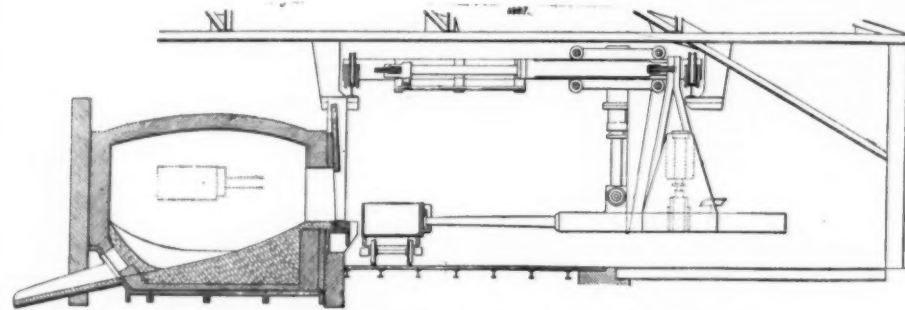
FIRST OPEN HEARTH CHARGING MACHINE.
